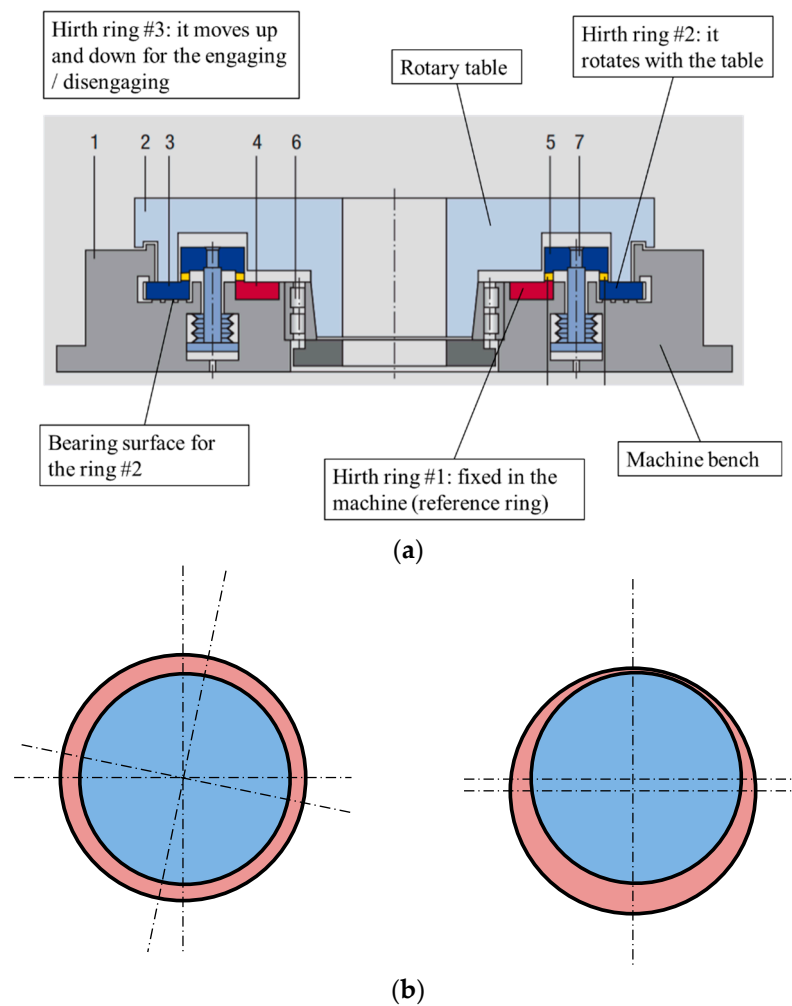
(a) Example of rotary table for the transfer machine tool; (b) position of ring #2 before engaging phase: left—the angle has to be adjusted; right—the center has to be adjusted.
